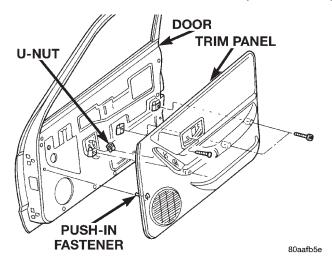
Front Door Trim Panel Remove/Install - Power Window
